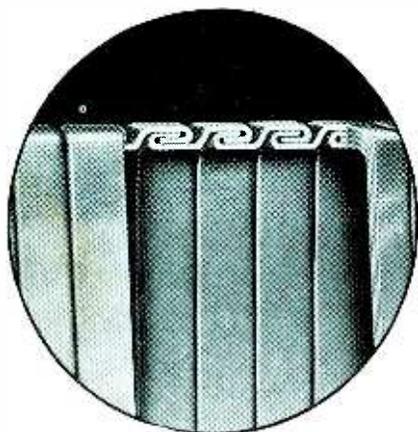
Enlarged cut-away view showing construction of interlocked type of flexible wave guide
